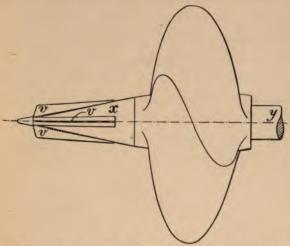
Parsons' Construction of Propeller Boss to diminish Cavitation.
